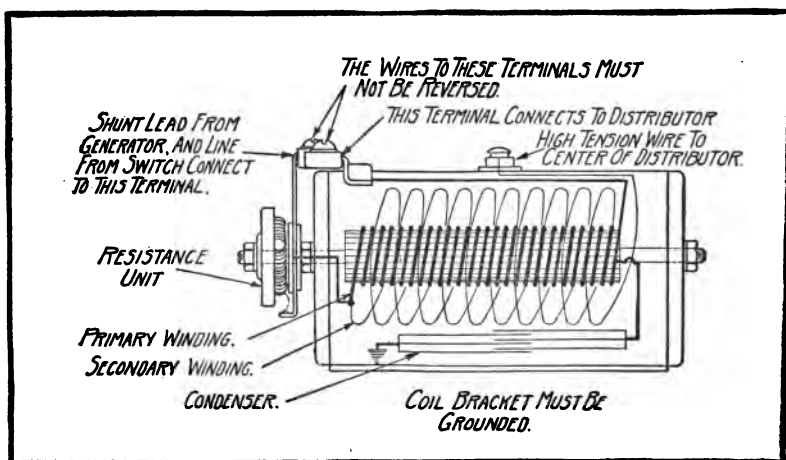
Sectional View Showing Arrangement of Wiring in Delco Ignition Coil.
